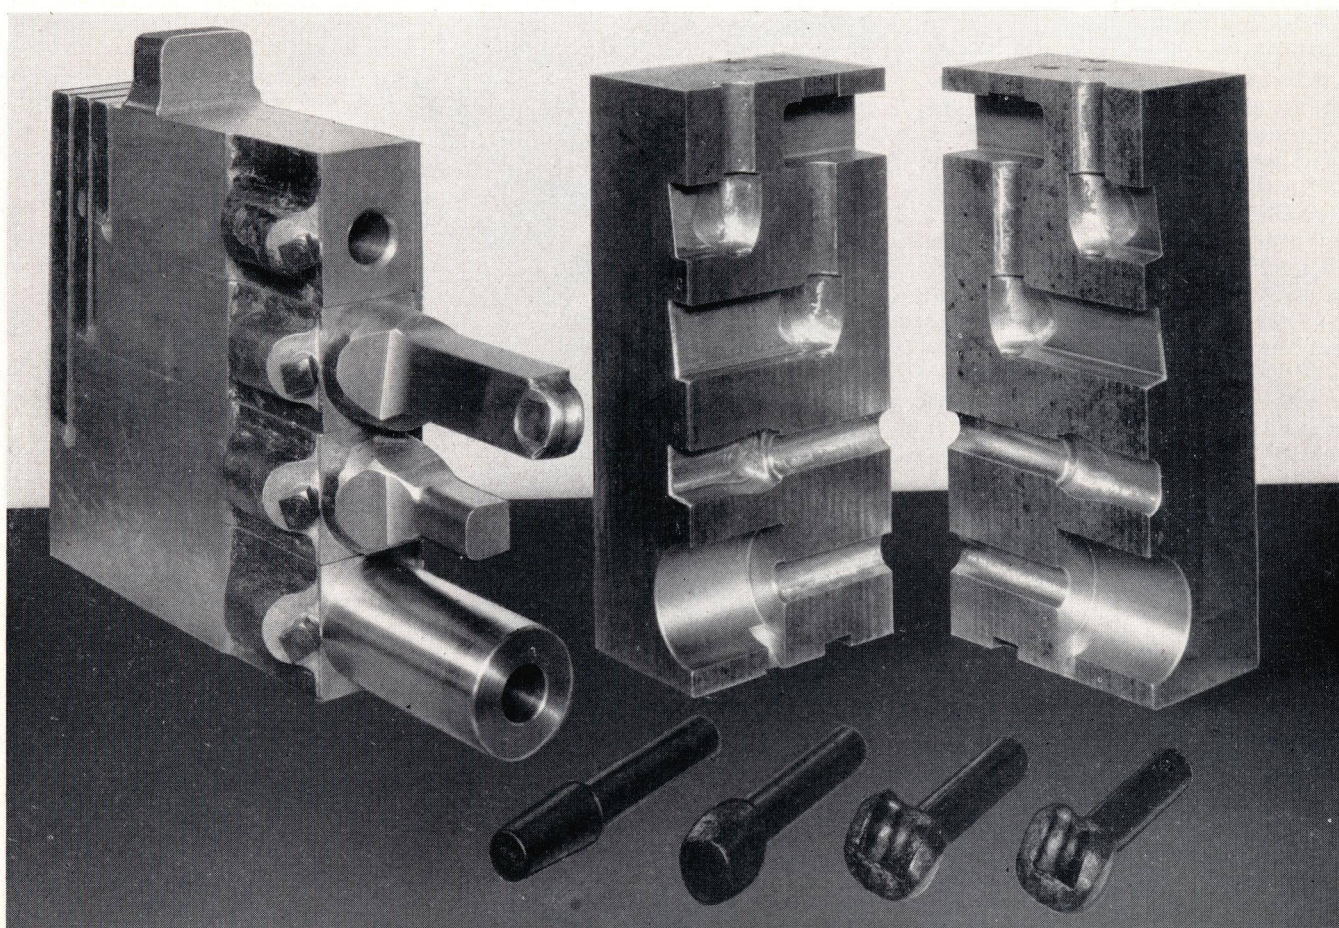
Dies for forging a roller type steering gear cross-shaft.
